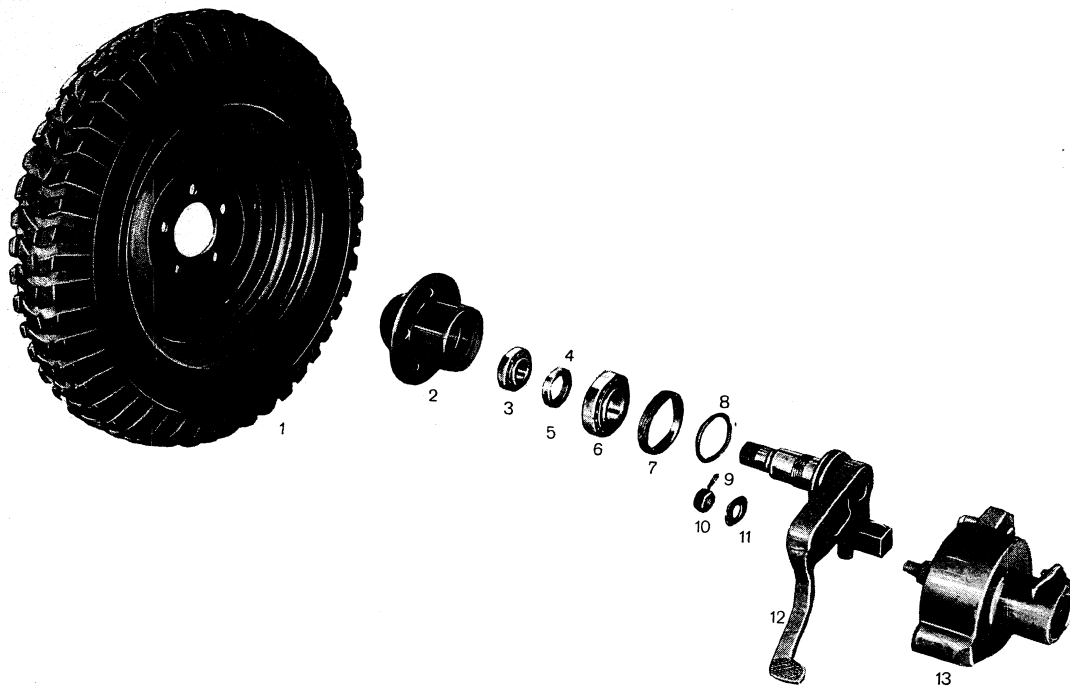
WHEEL WITH PNEUMATIC TYRE — DISMANTLED (for weapons B1 and B1A1)
